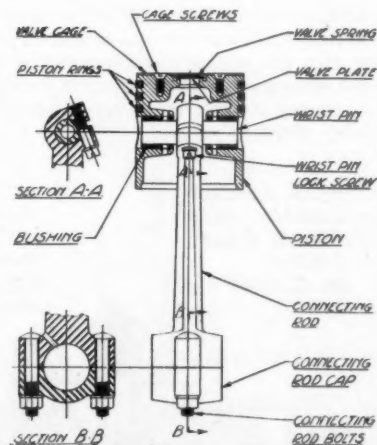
COMMERCIAL PISTON ASSEMBLY
